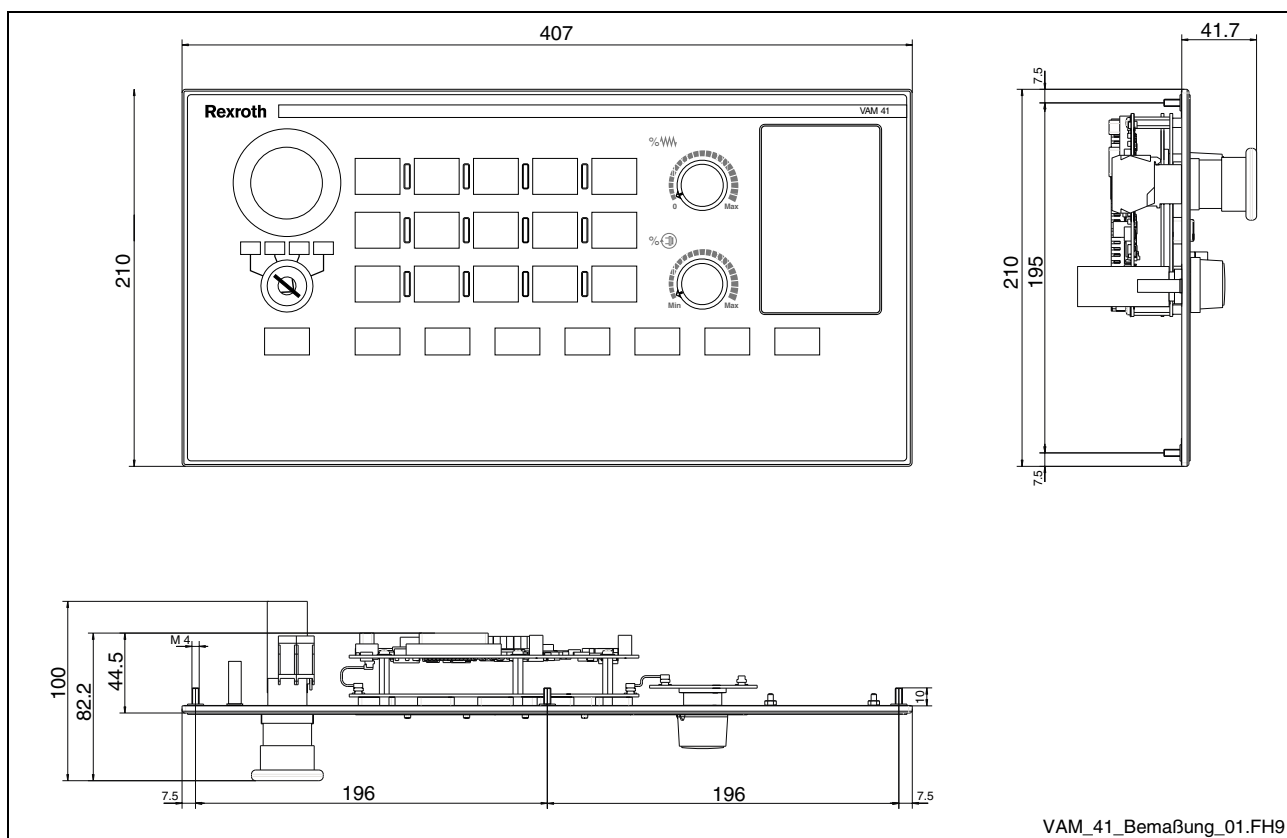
Housing dimensions VAM 41.1, front, side and top view
